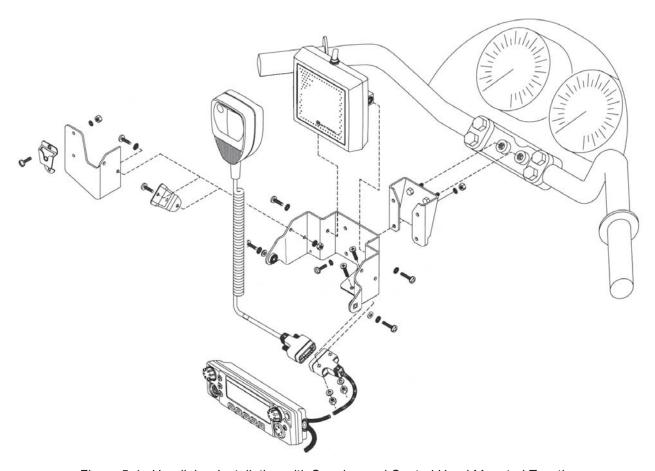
Handlebar Installation with Speaker and Control Head Mounted Together
